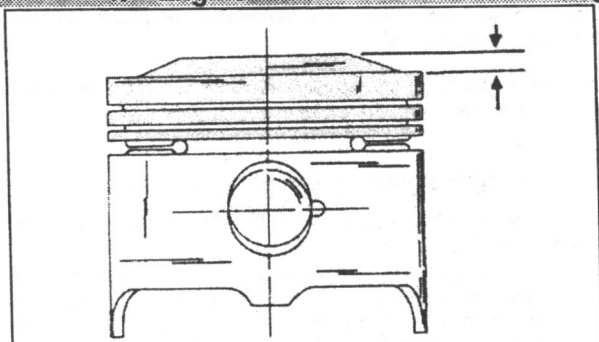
Sectional view of a piston as fitted to the earlier engine. Pistons for later engines have a different piston crown.
